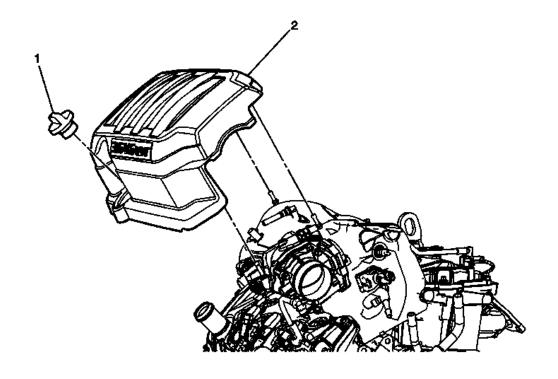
View Of Fuel Injector Sight Shield Courtesy of GENERAL MOTORS COMPANY
